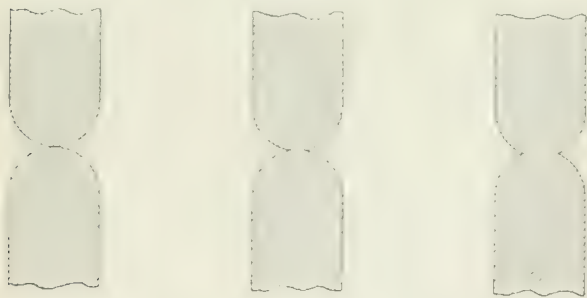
Experiments in Welding Round Ended Prisms of Steel.
